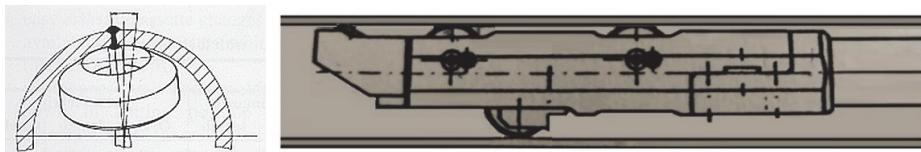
Device for removing the rootstock a) a knife for removing the podvara, b) a knife holder
